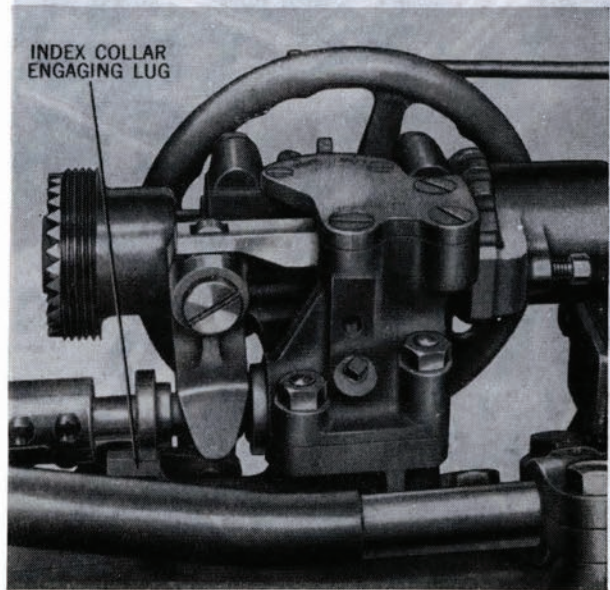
Simple Type Speed Setting Mechanism—Rear View—Spindle OUT.
